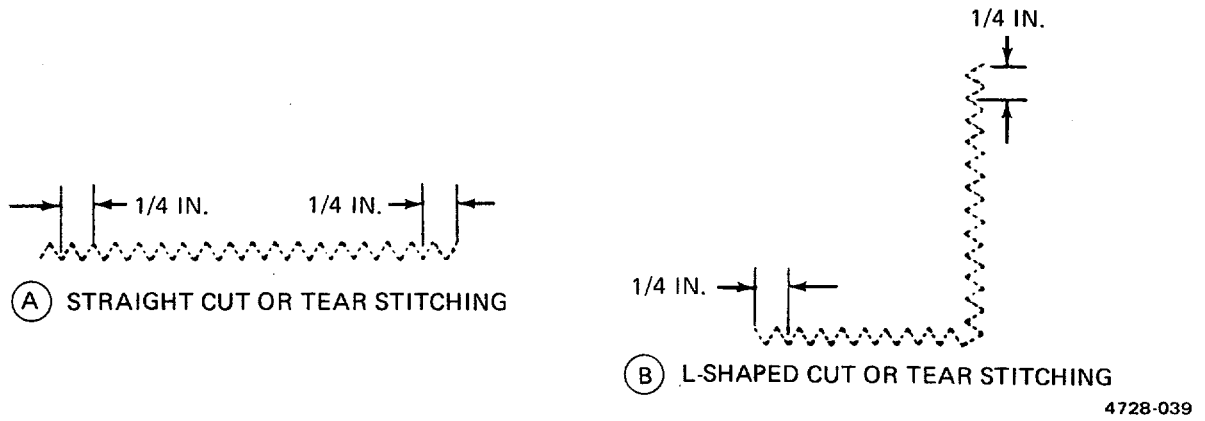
Repair Method Using a Zig-Zag Sewing Machine
